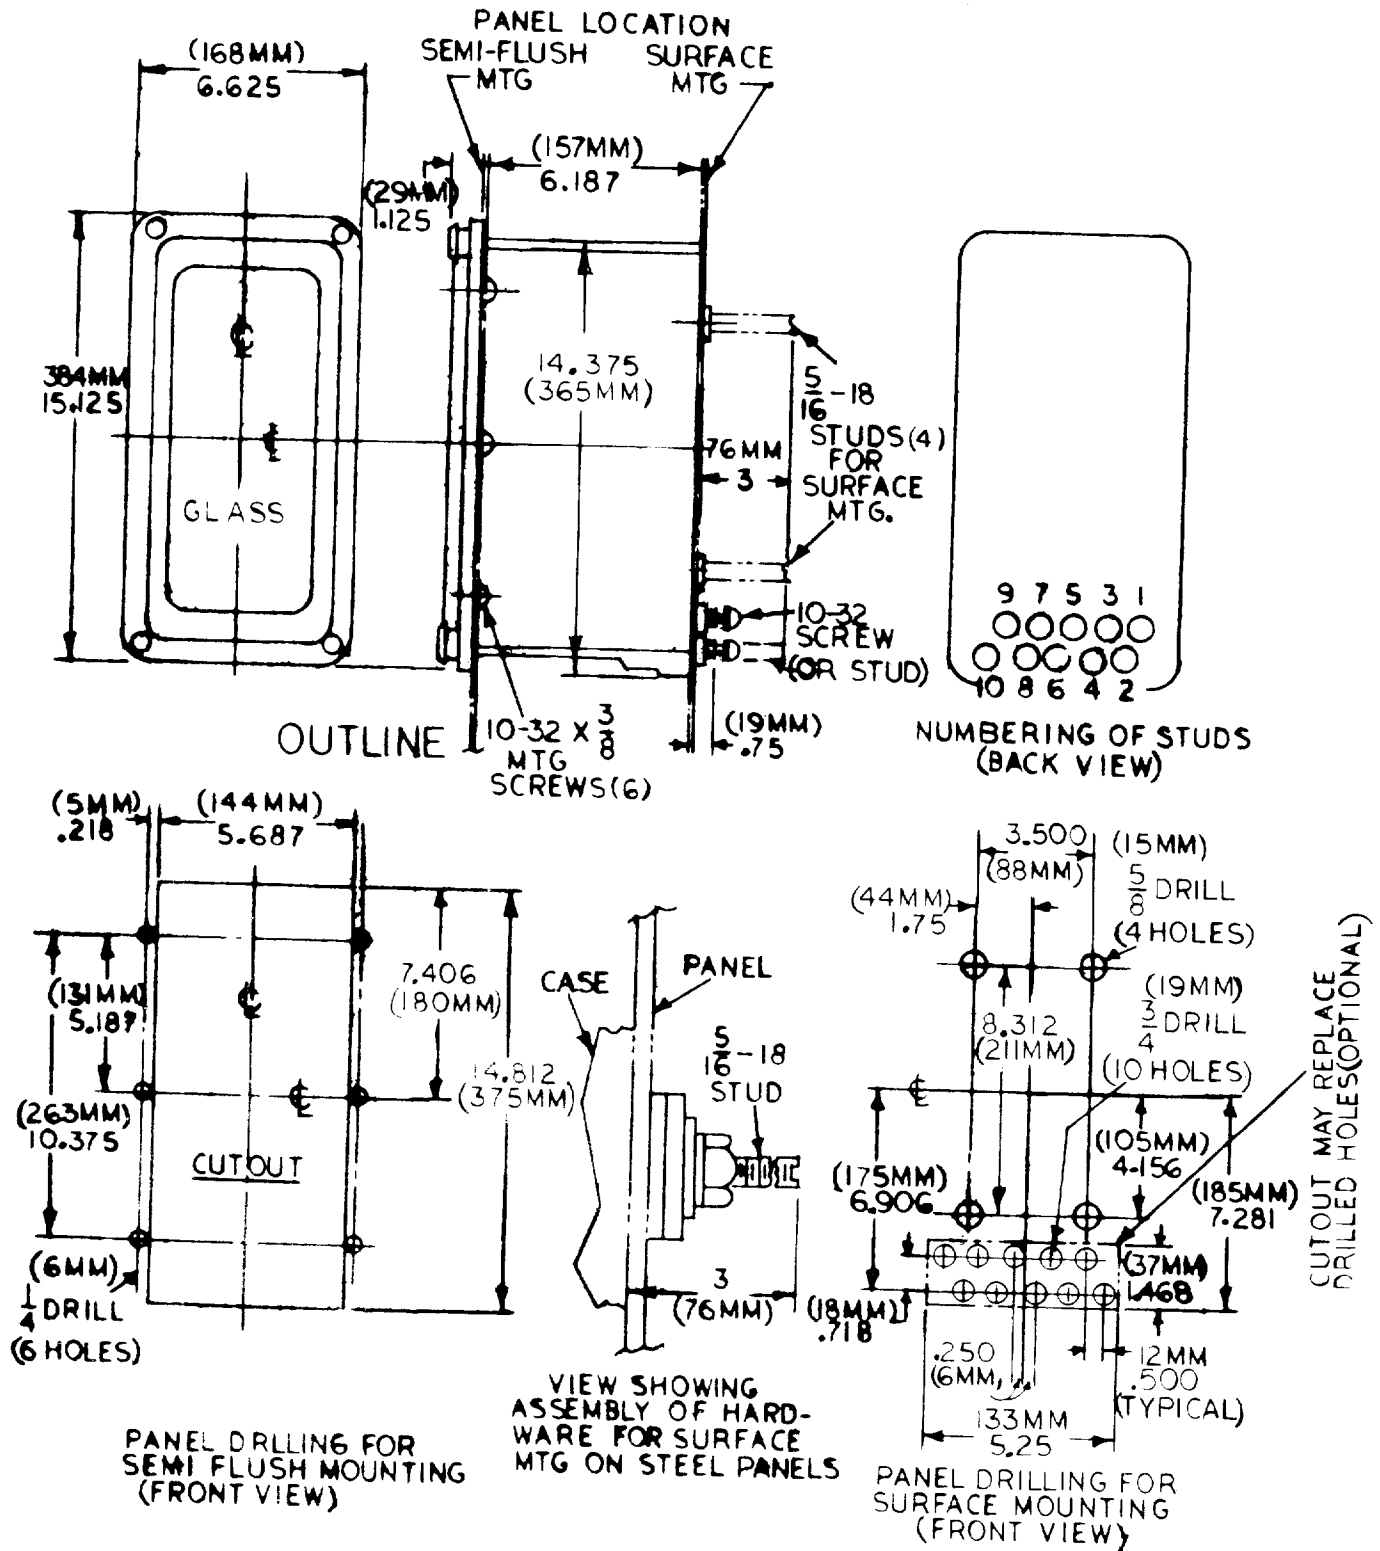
(K6209273-4) Outline and Panel Drilling Dimensions
